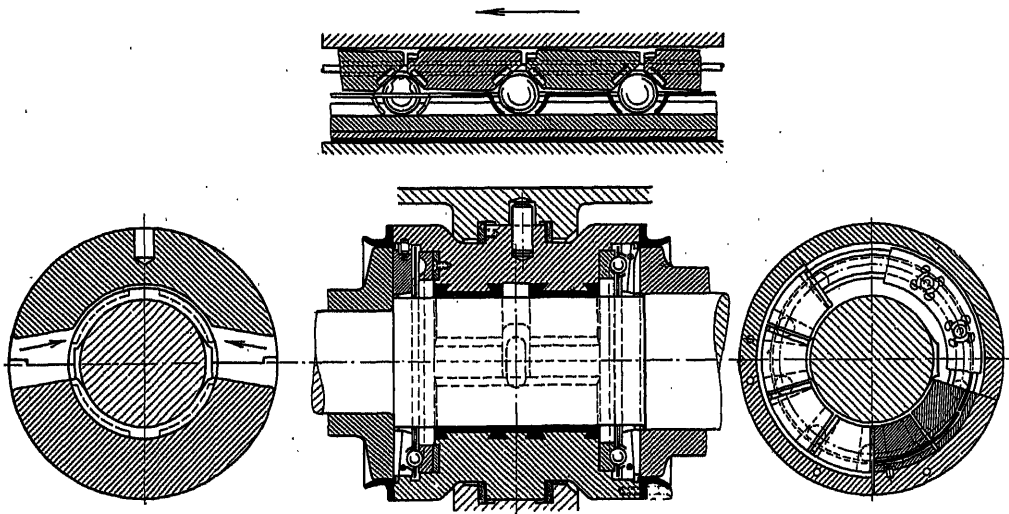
B.B.C.*, double thrust bearing with movable pads supported on points (balls), and journal bearing
